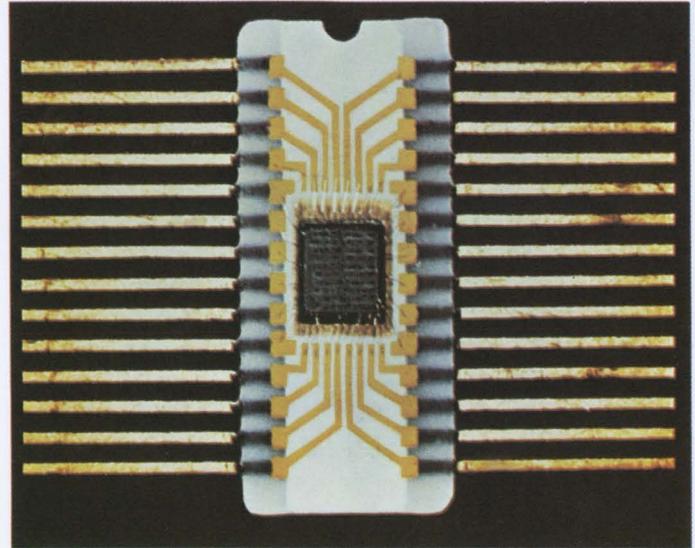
Completed Uni-Cell circuit mounted in 28-lead package ready for testing and capping.
